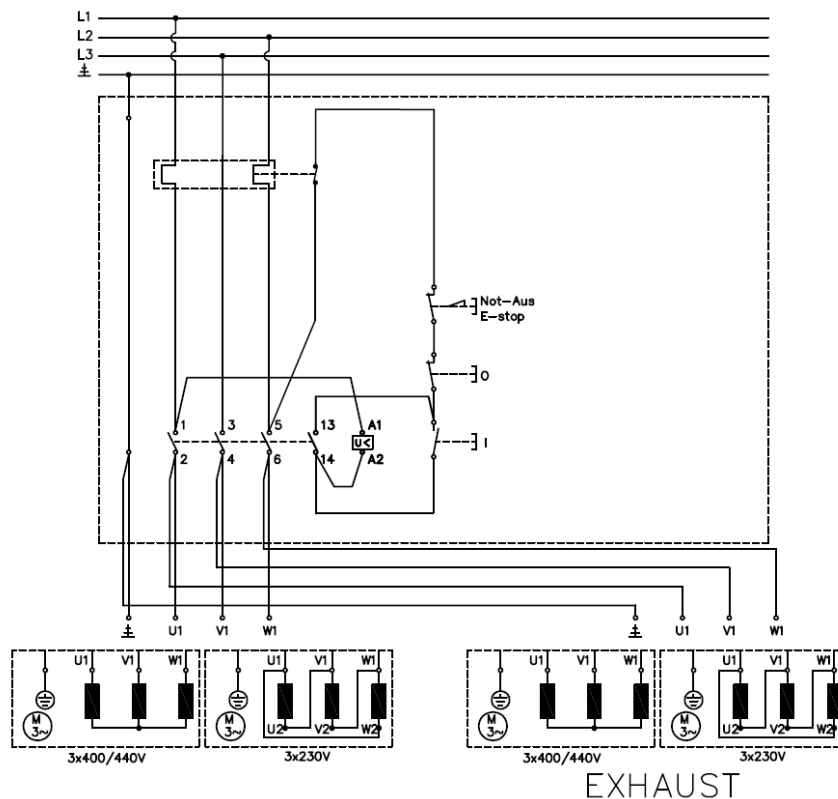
Diagram of belt grinder with exhaustmotor.
